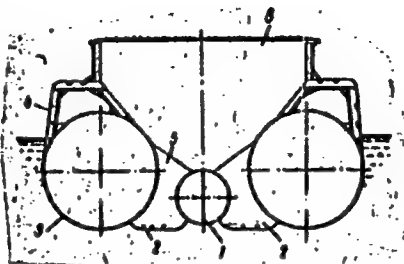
1 - center detachable cylindrical shell tanks; 2 - floor plates; 3 - outboard cylindrical shell tanks; 4 - twin side decks; 5 - deck of the second bottom on the floor plates; 6 - hold for dry loads.
